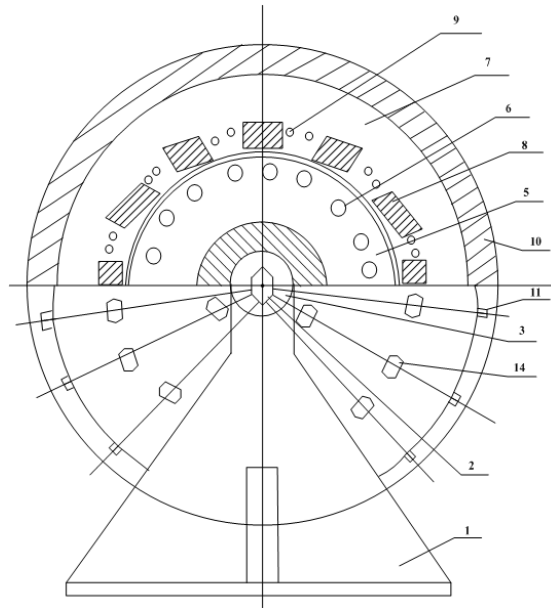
The electric motor of the fuel-handling machine working body of direct drive system
